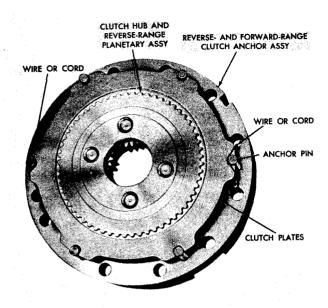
Reverse-range clutch plates on reverse-range planetary carrier and hub, wired in position on reverse-and forward-range anchor
